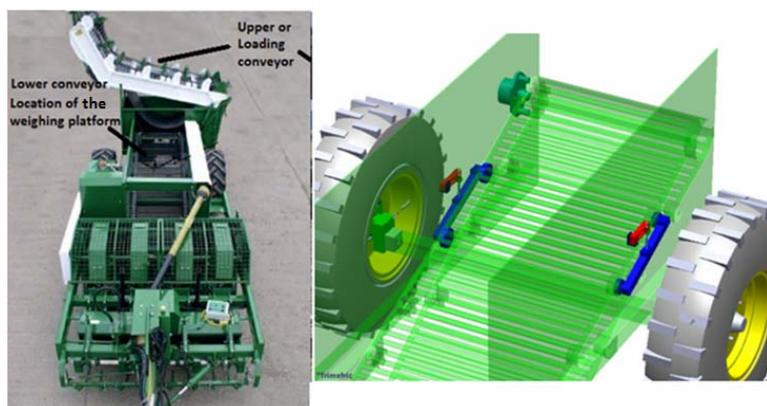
a) A general view of the sugar beet harvesting machine; b) Weighing platform and its location on the machine
